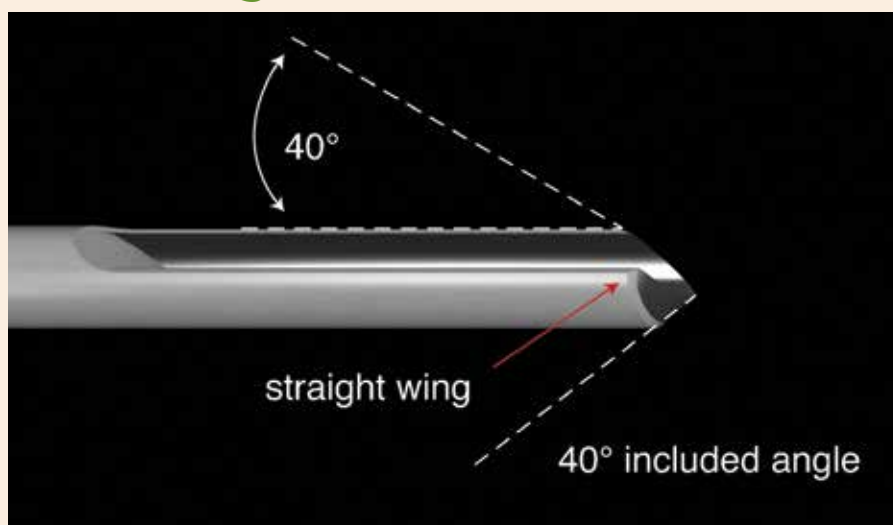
The 40°/40° grind, shown here on a bowl gouge with an elliptical-shaped flute. Both the bevel and the straight wings (cutting edges) are at 40° to the tool's shaft. This grind works well for spindle and bowl turning and is integral to the techniques I teach.
